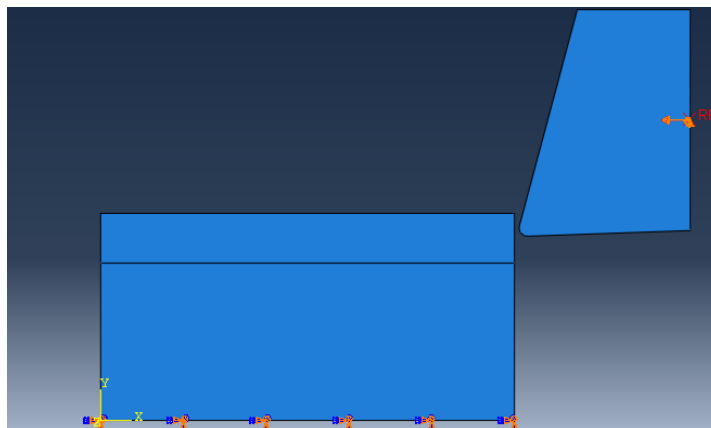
Boundary Constraints of Workpiece and Tool piece.
